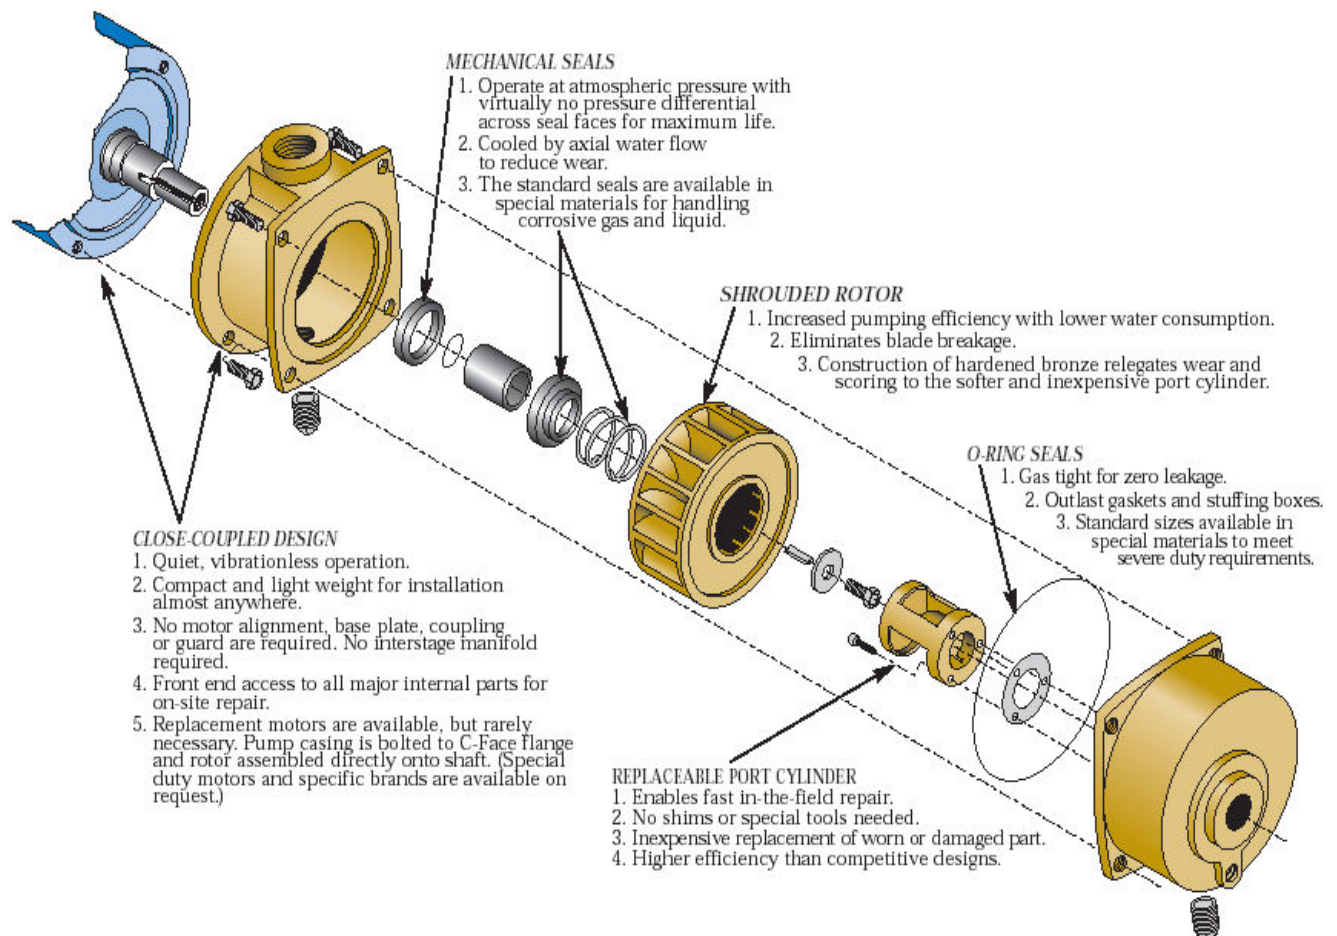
Parts of Liquid Ring Vacuum Pump
